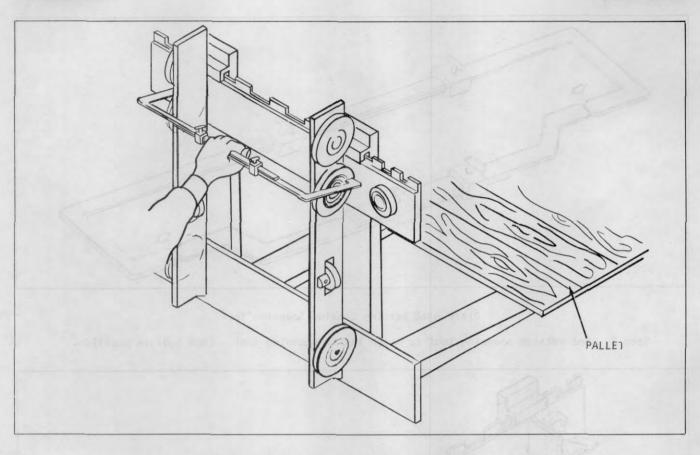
Spanning Upper Rollers (Six Roller Carriage)
